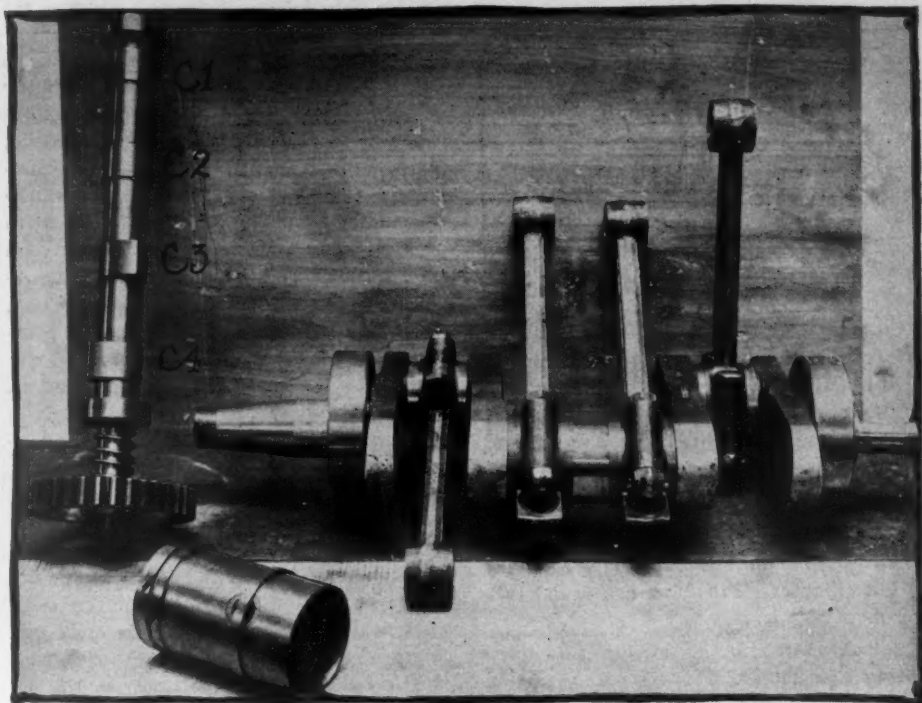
CRANKSHAFT AND CAMSHAFT ARE BOTH BALL BEARING
